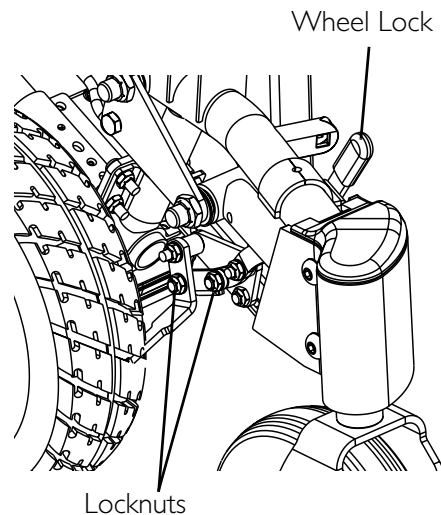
Engaging/Disengaging/Adjusting Wheel Locks - Engaging/Disengaging
